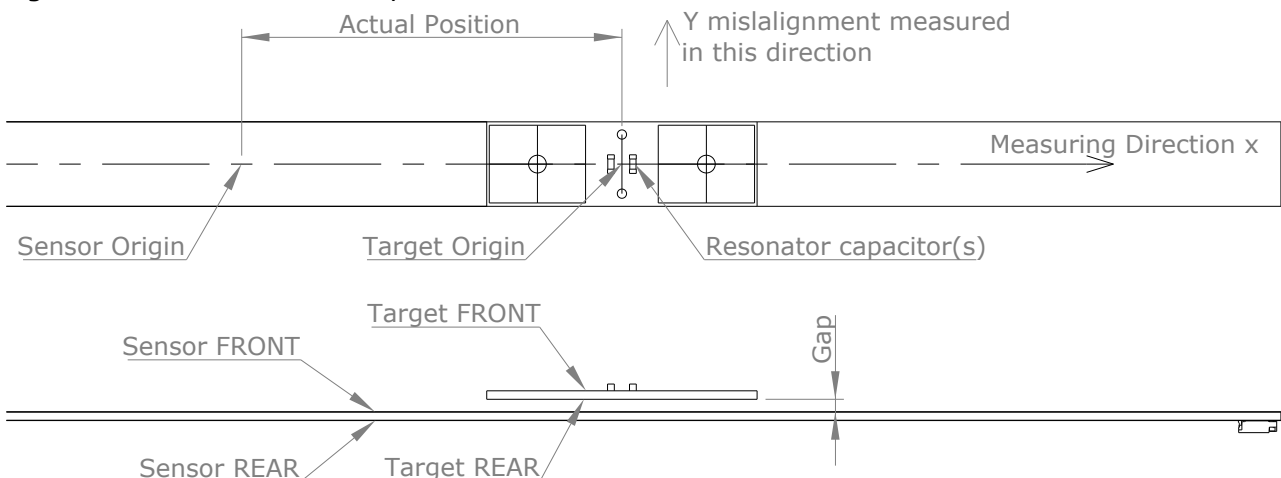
Alignment of sensor PCB assemblies with target 013-1043
